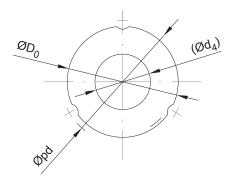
Hole dimension of the Standard Hollow Type Spline Shaft
